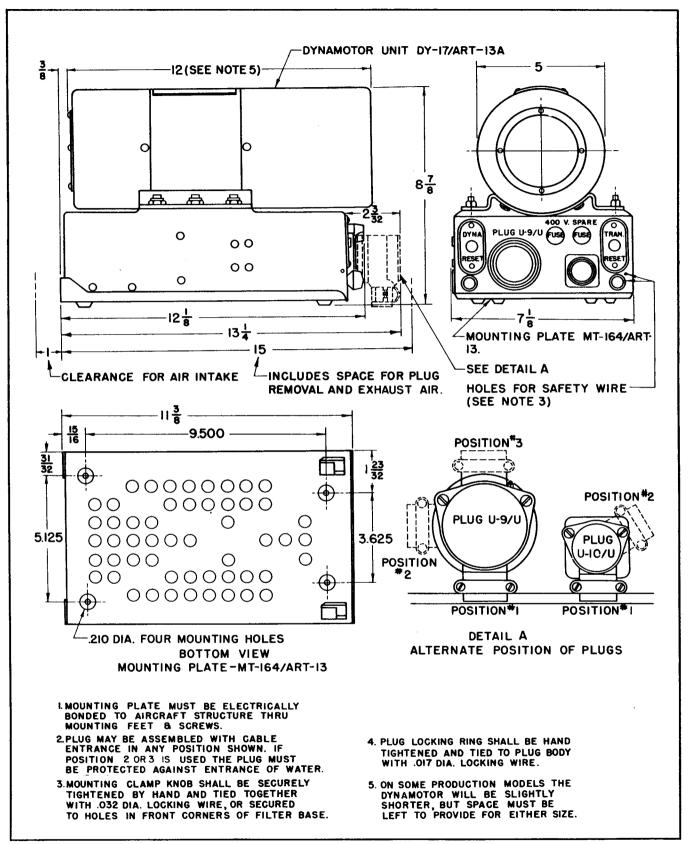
Dynamotor Unit DY-17/ART-13A — Outline Dimensions
